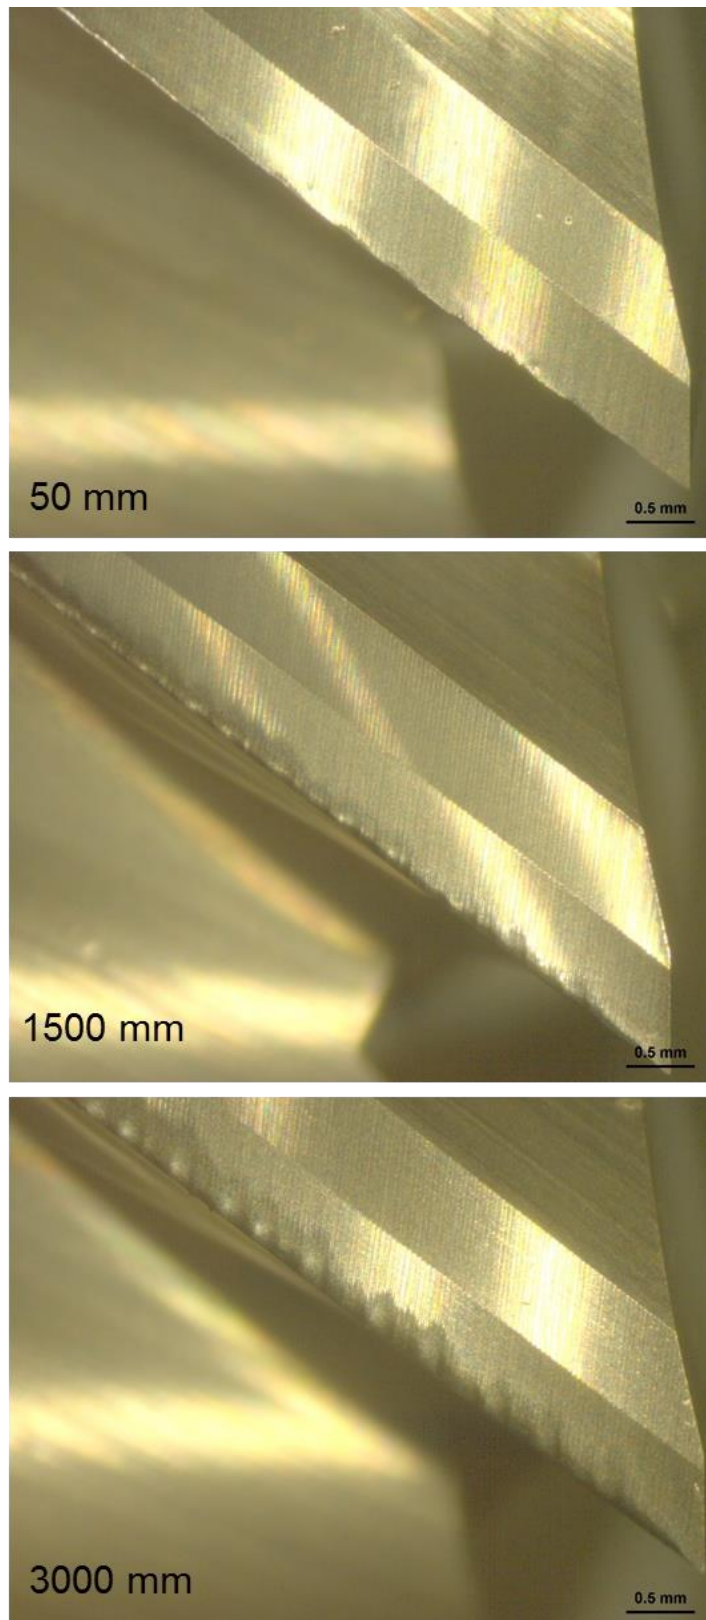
Microscopy images of tungsten carbide end mill used in CM CCF.
